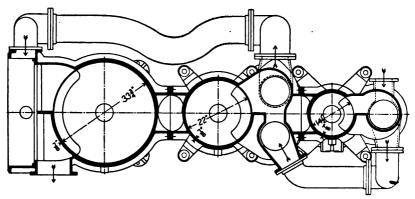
Cylinders of Small Triple-expansion Marine Engine; see also Figs. 243, 260, and 411; stroke 18". Scale 1 to 32.
